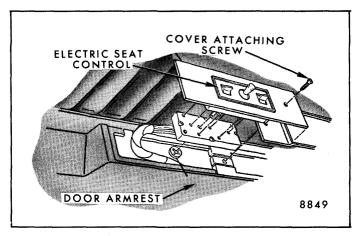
Front Seat Adjuster Control Cover Plate
